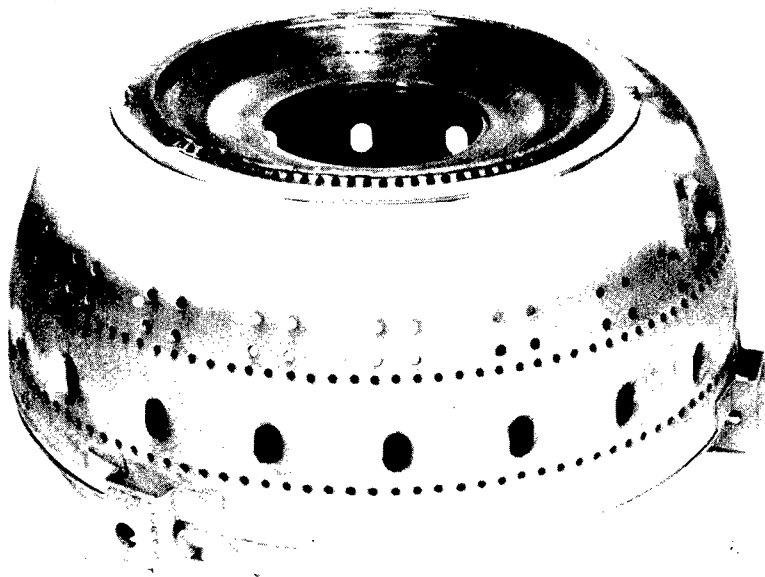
Outer Combustor Shell and Swirl Plate Assembly at Completion of Build 7 Testing - Turbine Rig.
